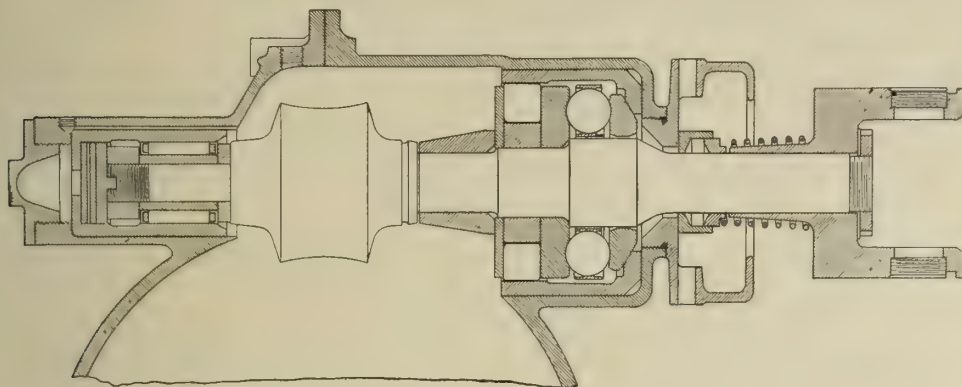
in. = 3.8 ins. approximately.
